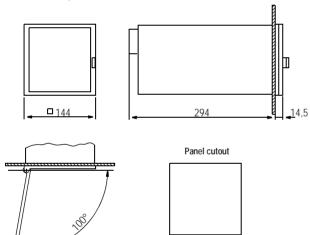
Dimensional drawing LINAX 4000H (dimensions in mm)
